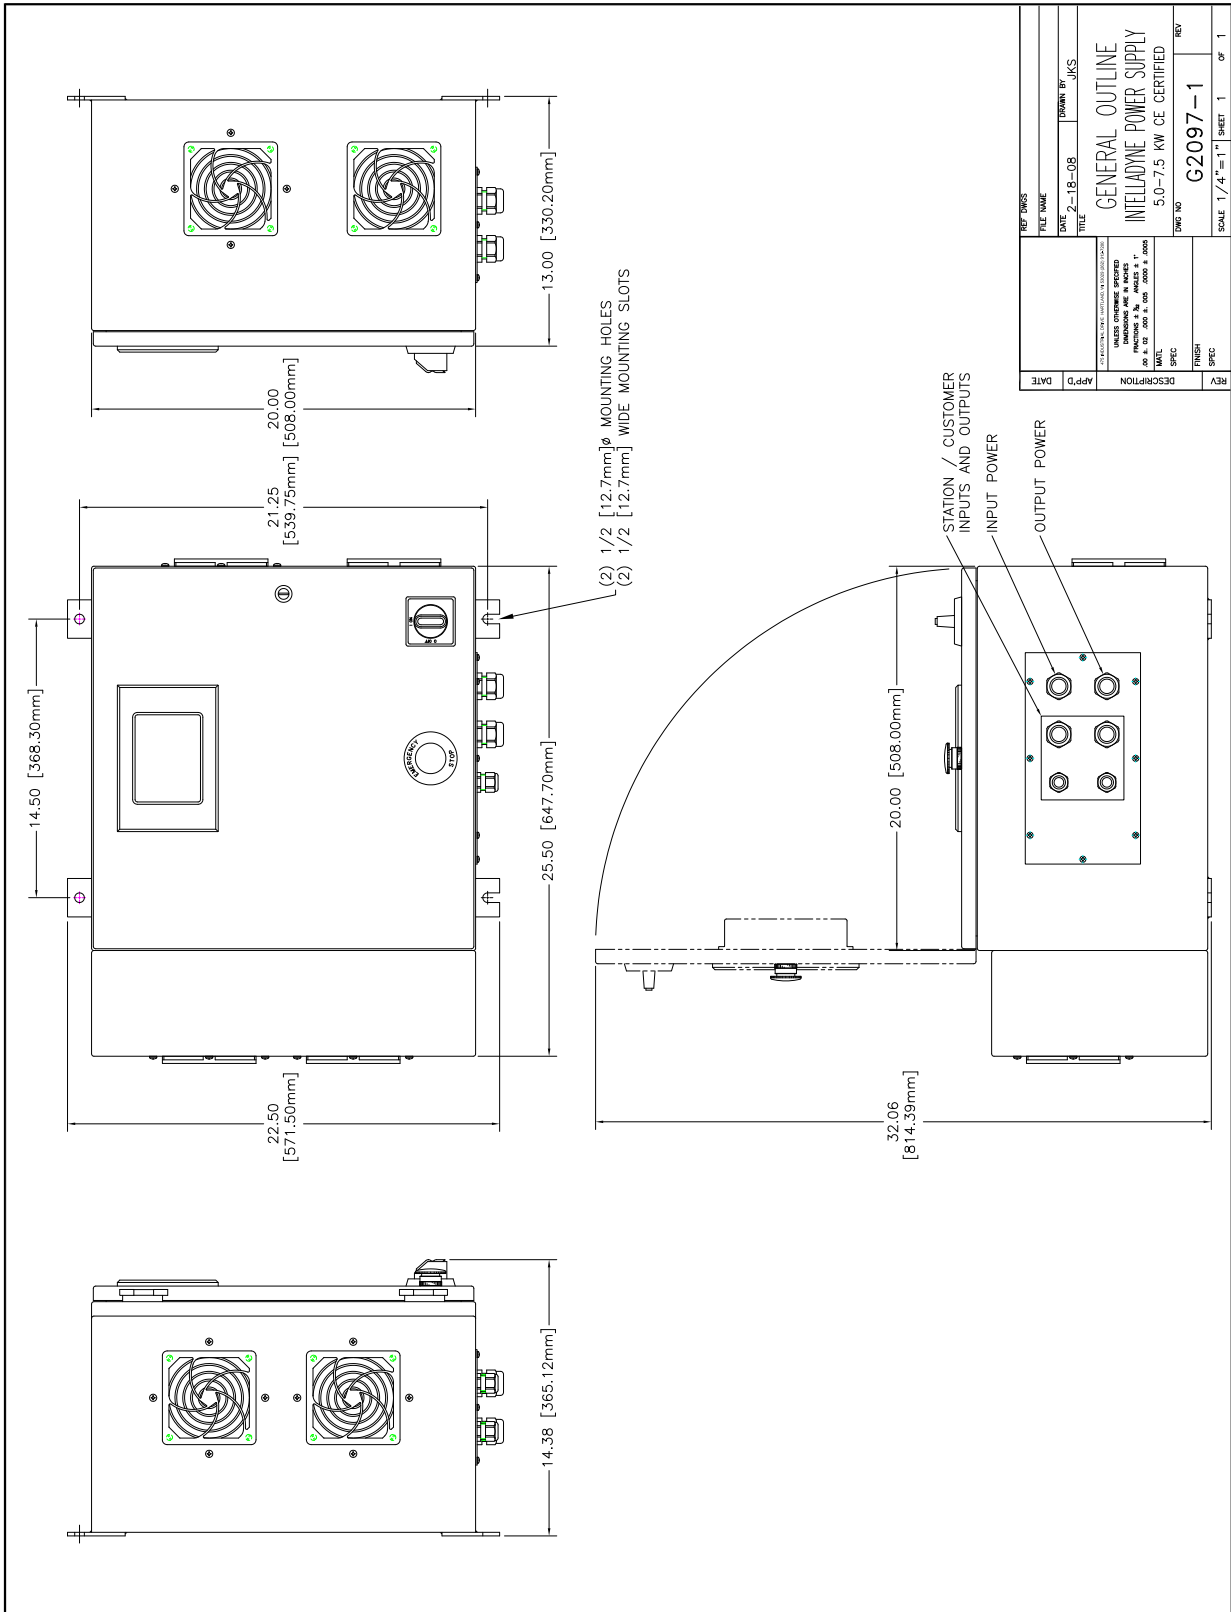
5.0-7.5 kW CSI Outline Drawing
